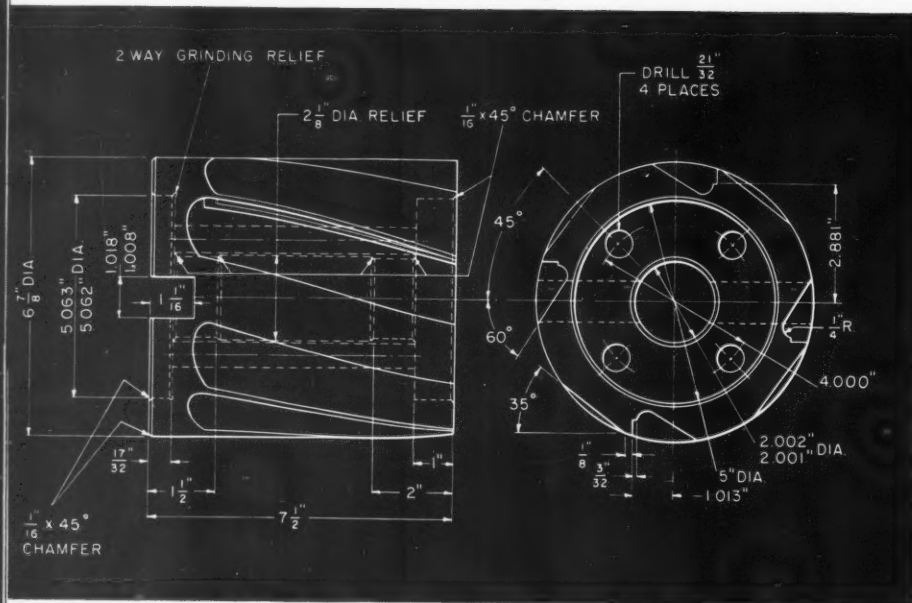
Cutter body designed for the four-blade helical carbide milling cutter that is illustrated in Fig. 1
